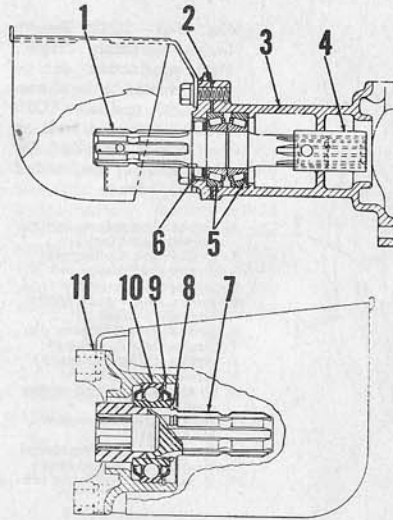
Adaptors provided by Ferguson convert the pto output shaft splines to the larger ASAE standard 1 3/8 size. Top view: Extension drawbar type conversion. Bottom view: Swinging drawbar type conversion.
